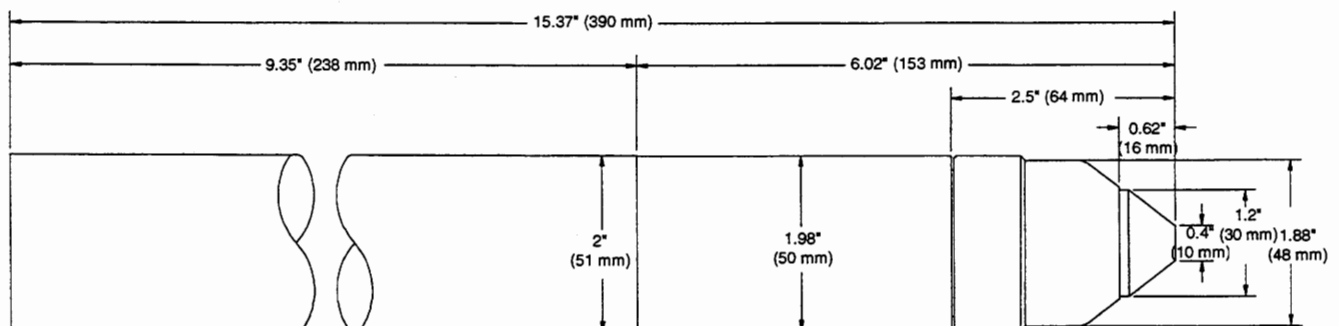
PAC620 Bevel Torch Assembly with Dimensions
